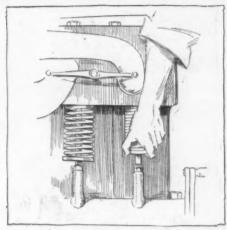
HOLDING UP VALVE WITH MOTOR RUNNING
